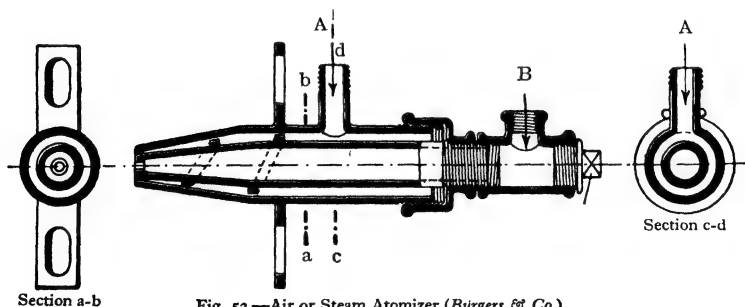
Air or Steam Atomizer (Burgers & Co.)
